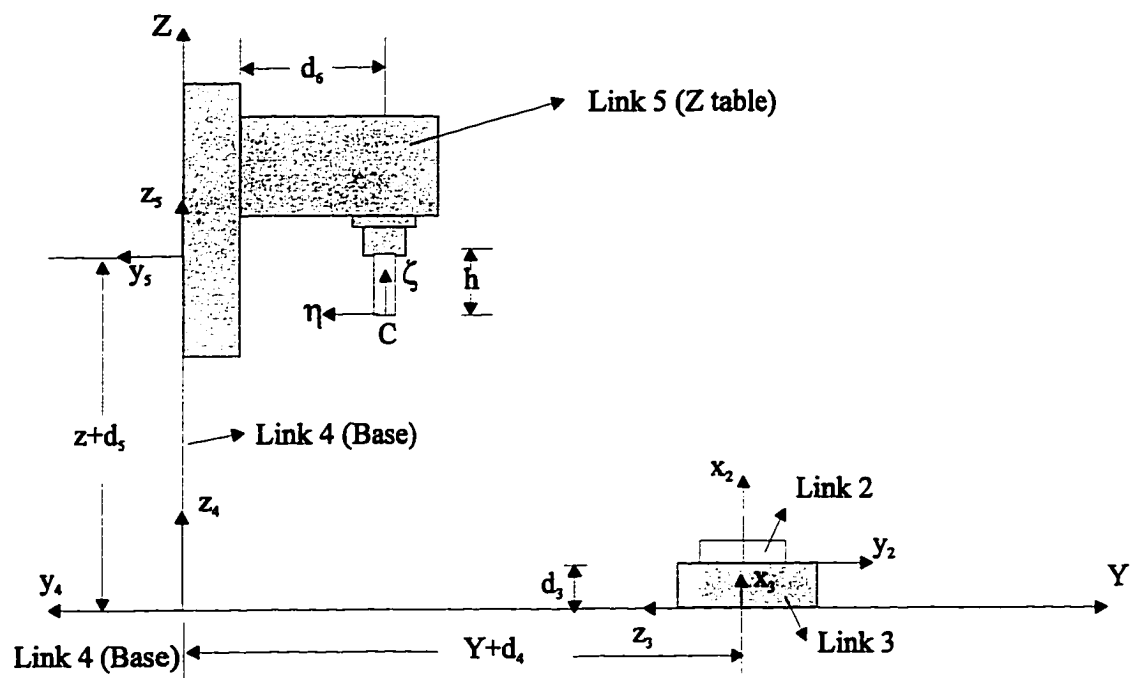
FADAL VMC-20 five-axis milling machine
